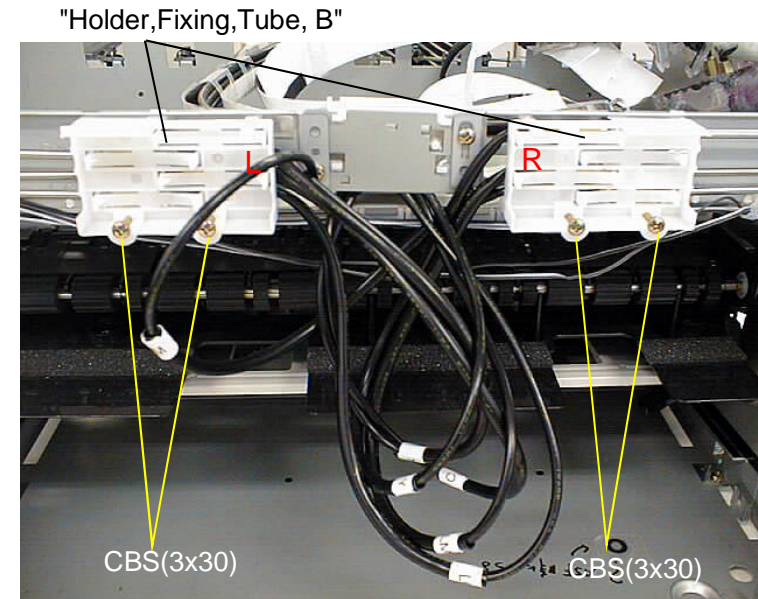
"Holder, Fixing, Tube, B" Removal
